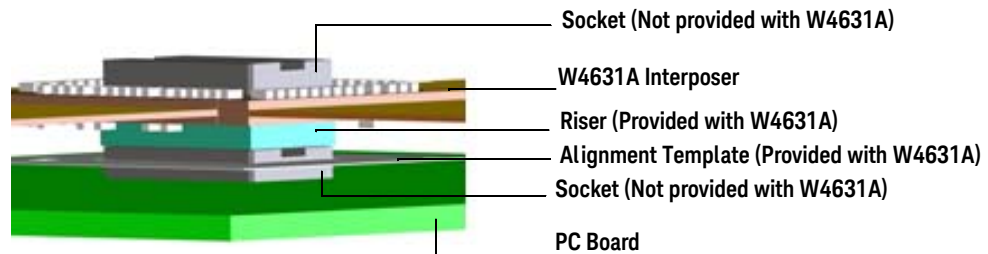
PC board, riser, optional Grypper sockets, and interposer stack up
